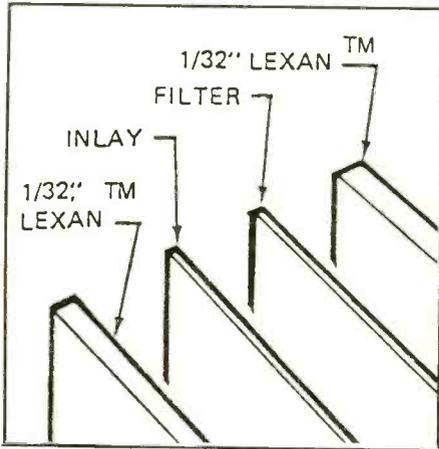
Assembly drawing for putting together front-panel "sandwiches."
